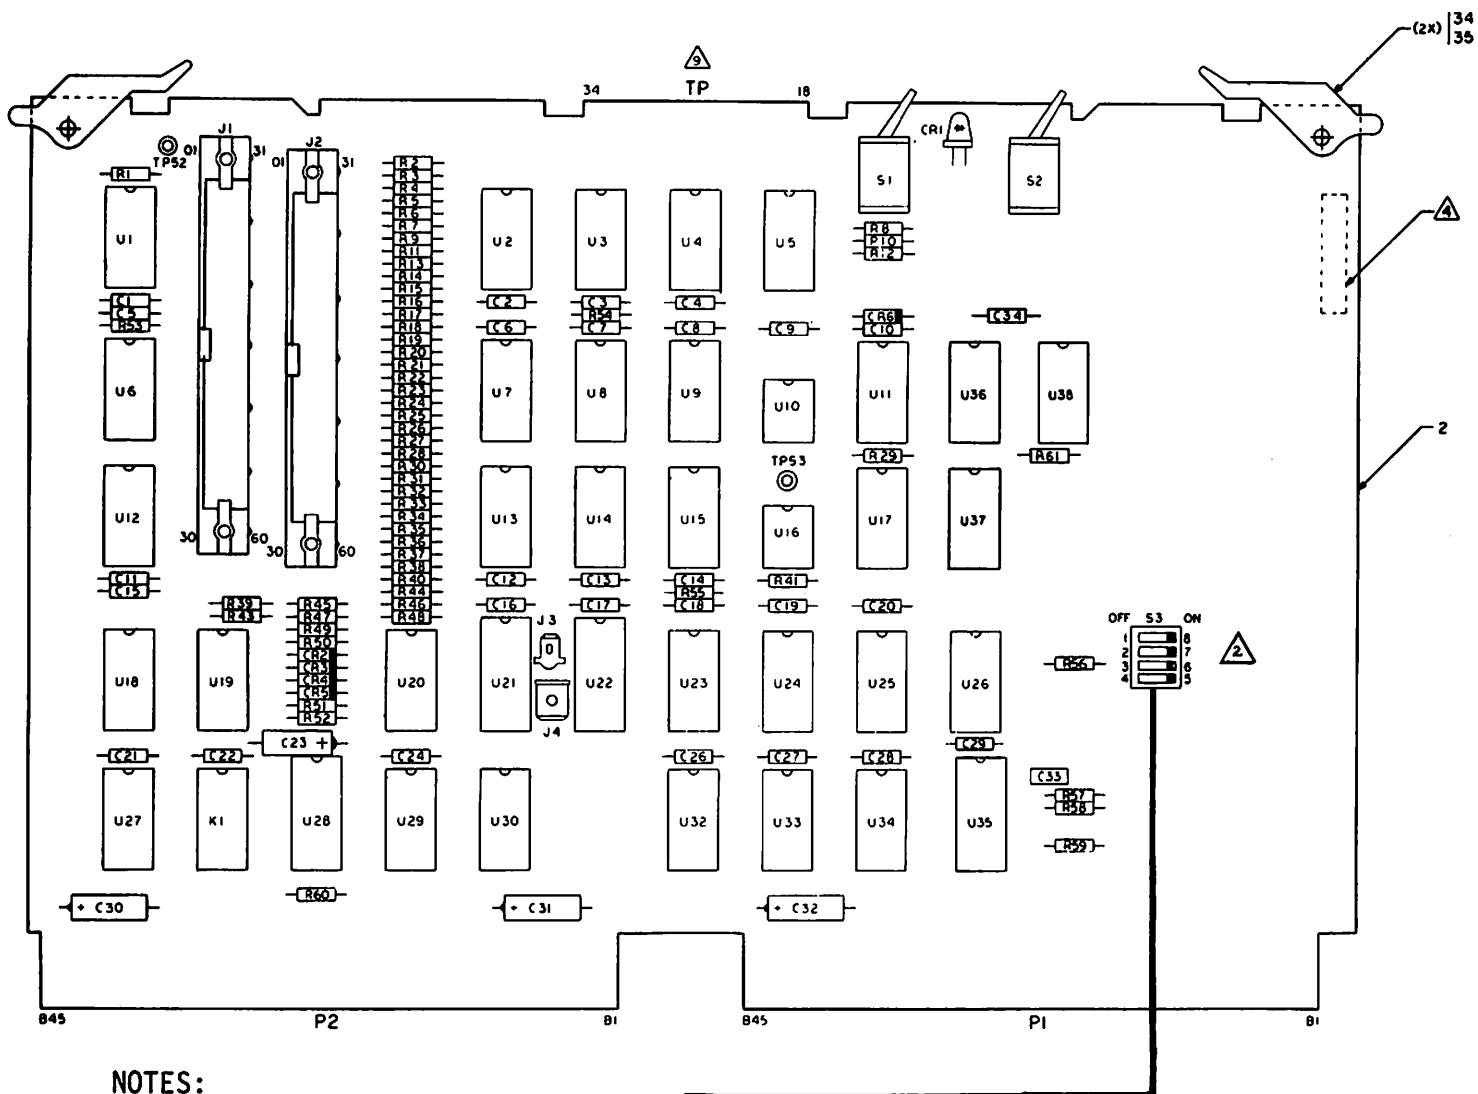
I/O CKT BOARD (SHEET 6 OF 9) (ASM 77622500 ONLY)
